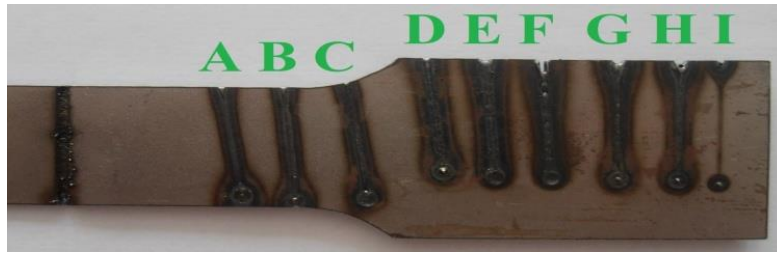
Shape and dimensions of the specimens used in the tests
